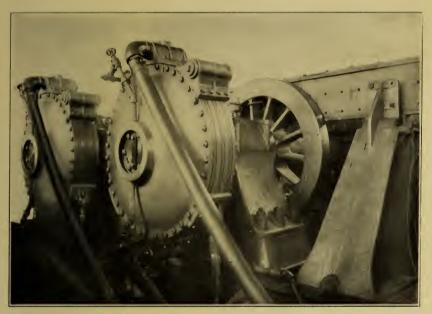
AN EXTERIOR VIEW OF THE BRAKES.
